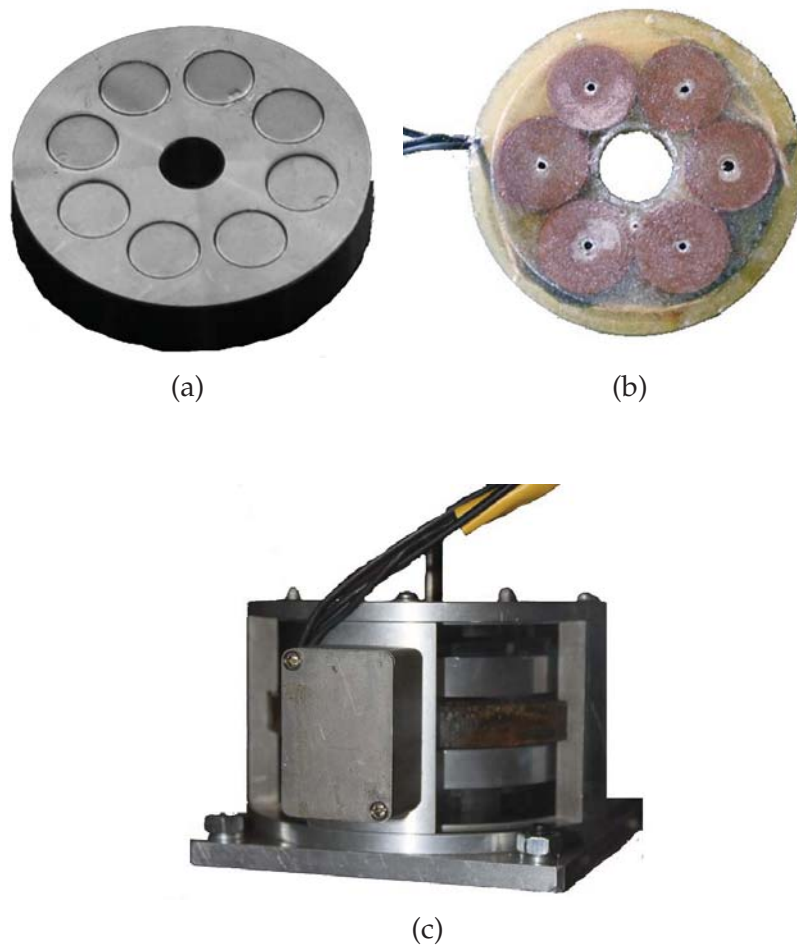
Prototype machine: (a) eight Magnets with aluminum alloy holder; (b) six coils potted in epoxy resin disk; (c) assembled machine.
